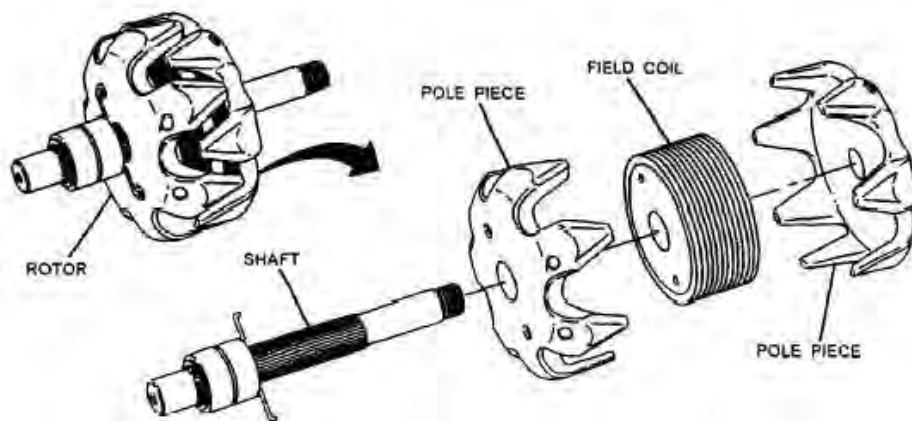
Alternator rotor assembly. *Integrated Publishing: <http://www.tpub.com/basae>
